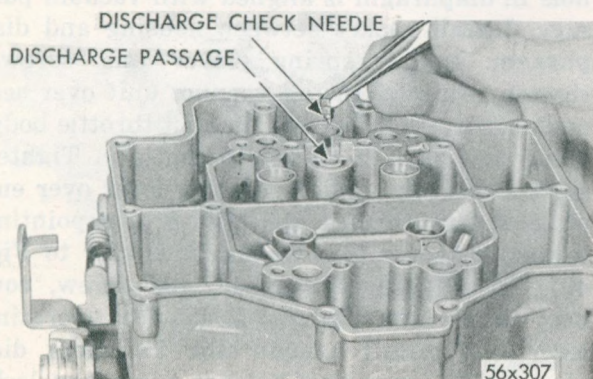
Installing Accelerator Pump Discharge Check Needle
